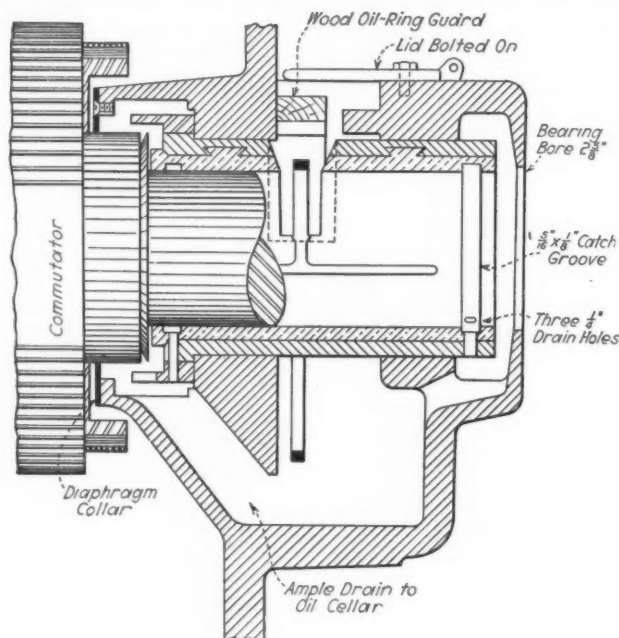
OIL TIGHTENING OF MOTOR BEARINGS
